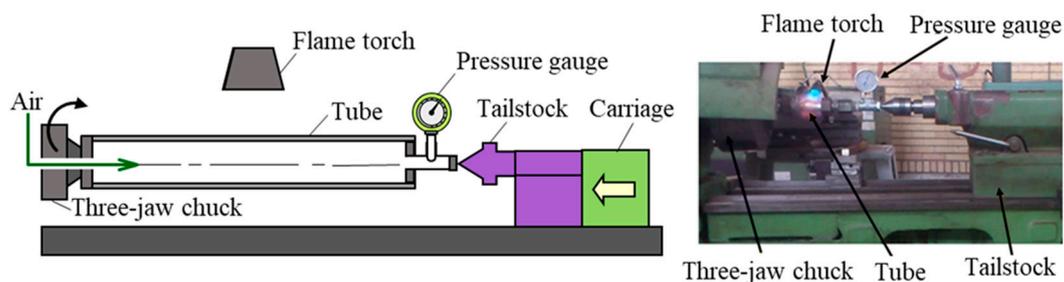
Set-up and tools for hot gas forming of aluminum alloy tubes using flame heating.
